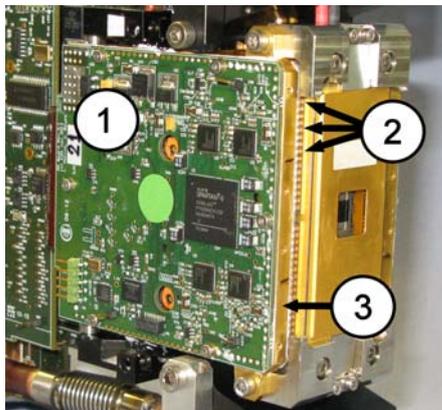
AD board and Clock driver assembly. 1) AD board, 2) Contacts on the Clock board, 3) Copper frame thermally connected to the cooling block.
